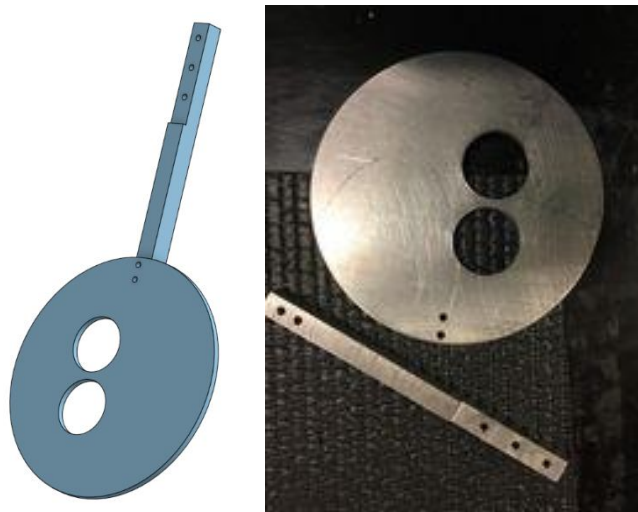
A 3D model of the target holder (left) and a picture of the holder (right)
